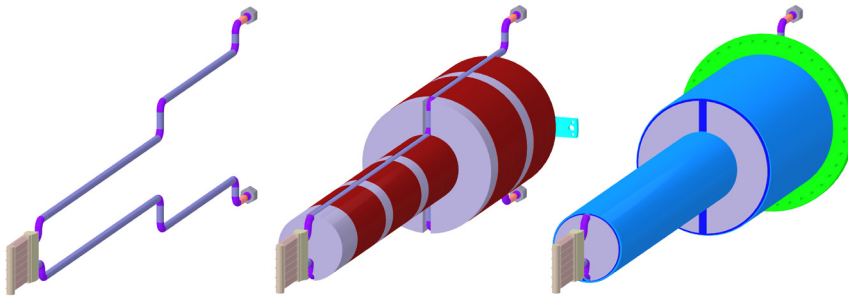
Coolant supply inside target plug; target with coolant pipes (left); including sandwich shielding layers of borated PE and lead (center); including aluminium plug housing and flange (light green) for closing the accelerator vacuum (right)
